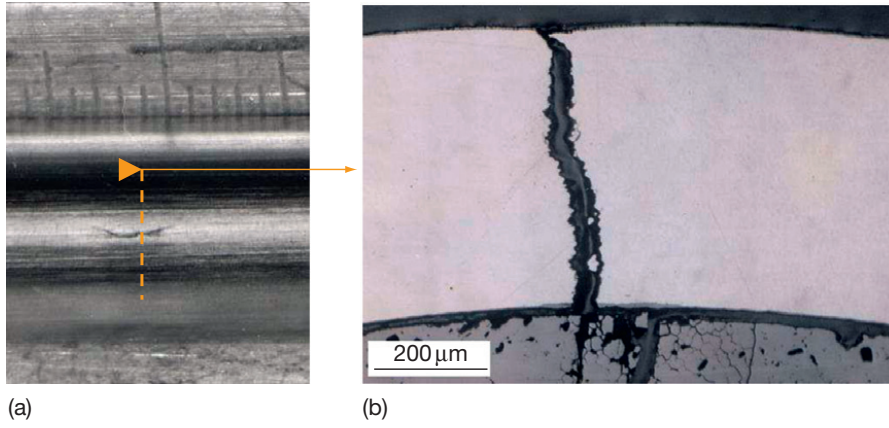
Typical I-SCC failure after a power ramp. a) Axial crack observed on the external surface of the cladding. b) I-SCC crack observed on a fuel cross-section near the pellet-pellet interface.
